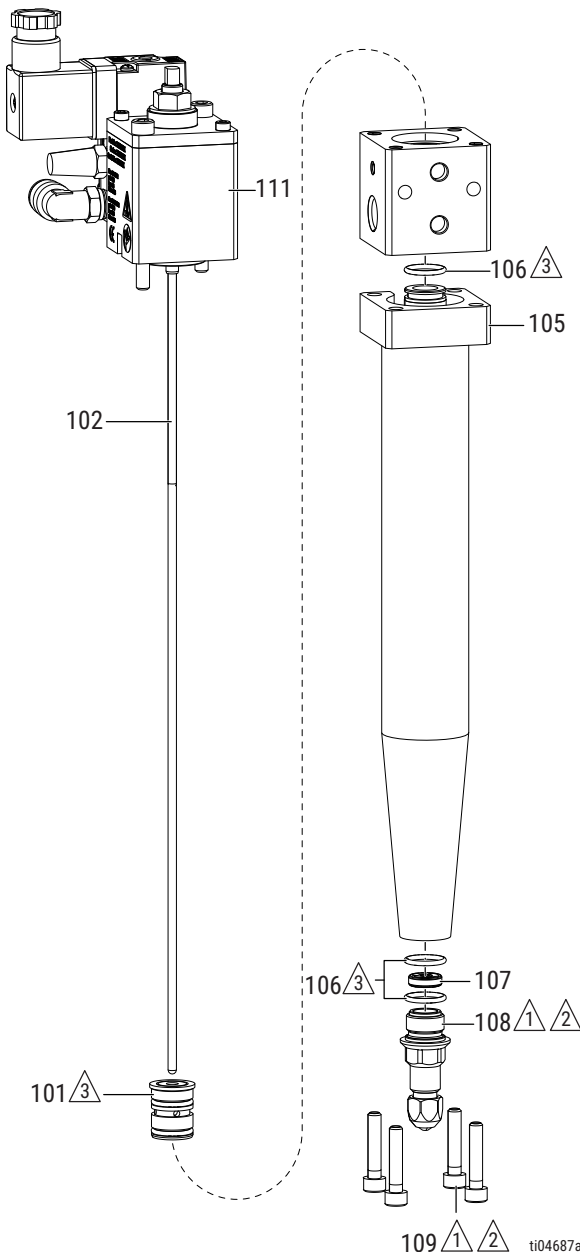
2011601 Tip Seal Valve (shown with 60 mm outlet block)
